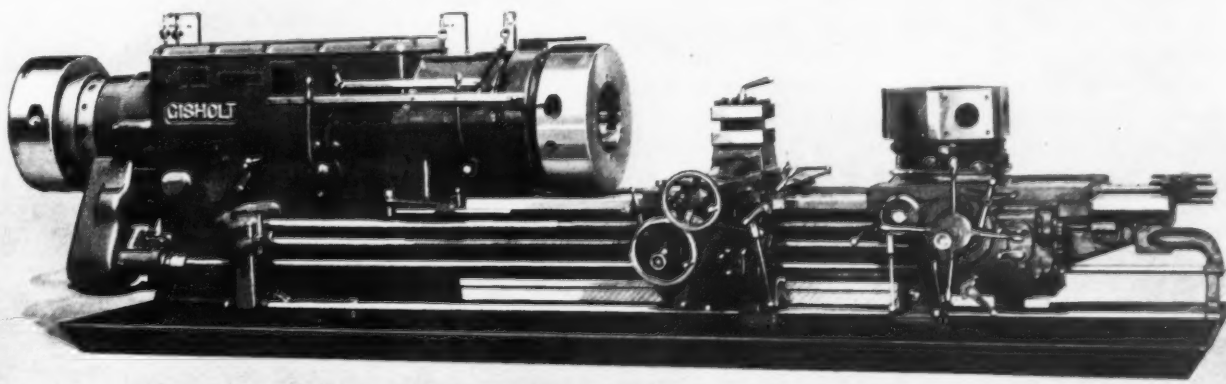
Gisholt Heavy-duty Turret Lathe Adapted for Machining and Threading Large Oil-well Pipes
